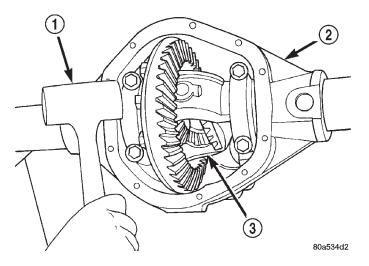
Seat Pinion Gear Side Differential Dummy Side Bearing
